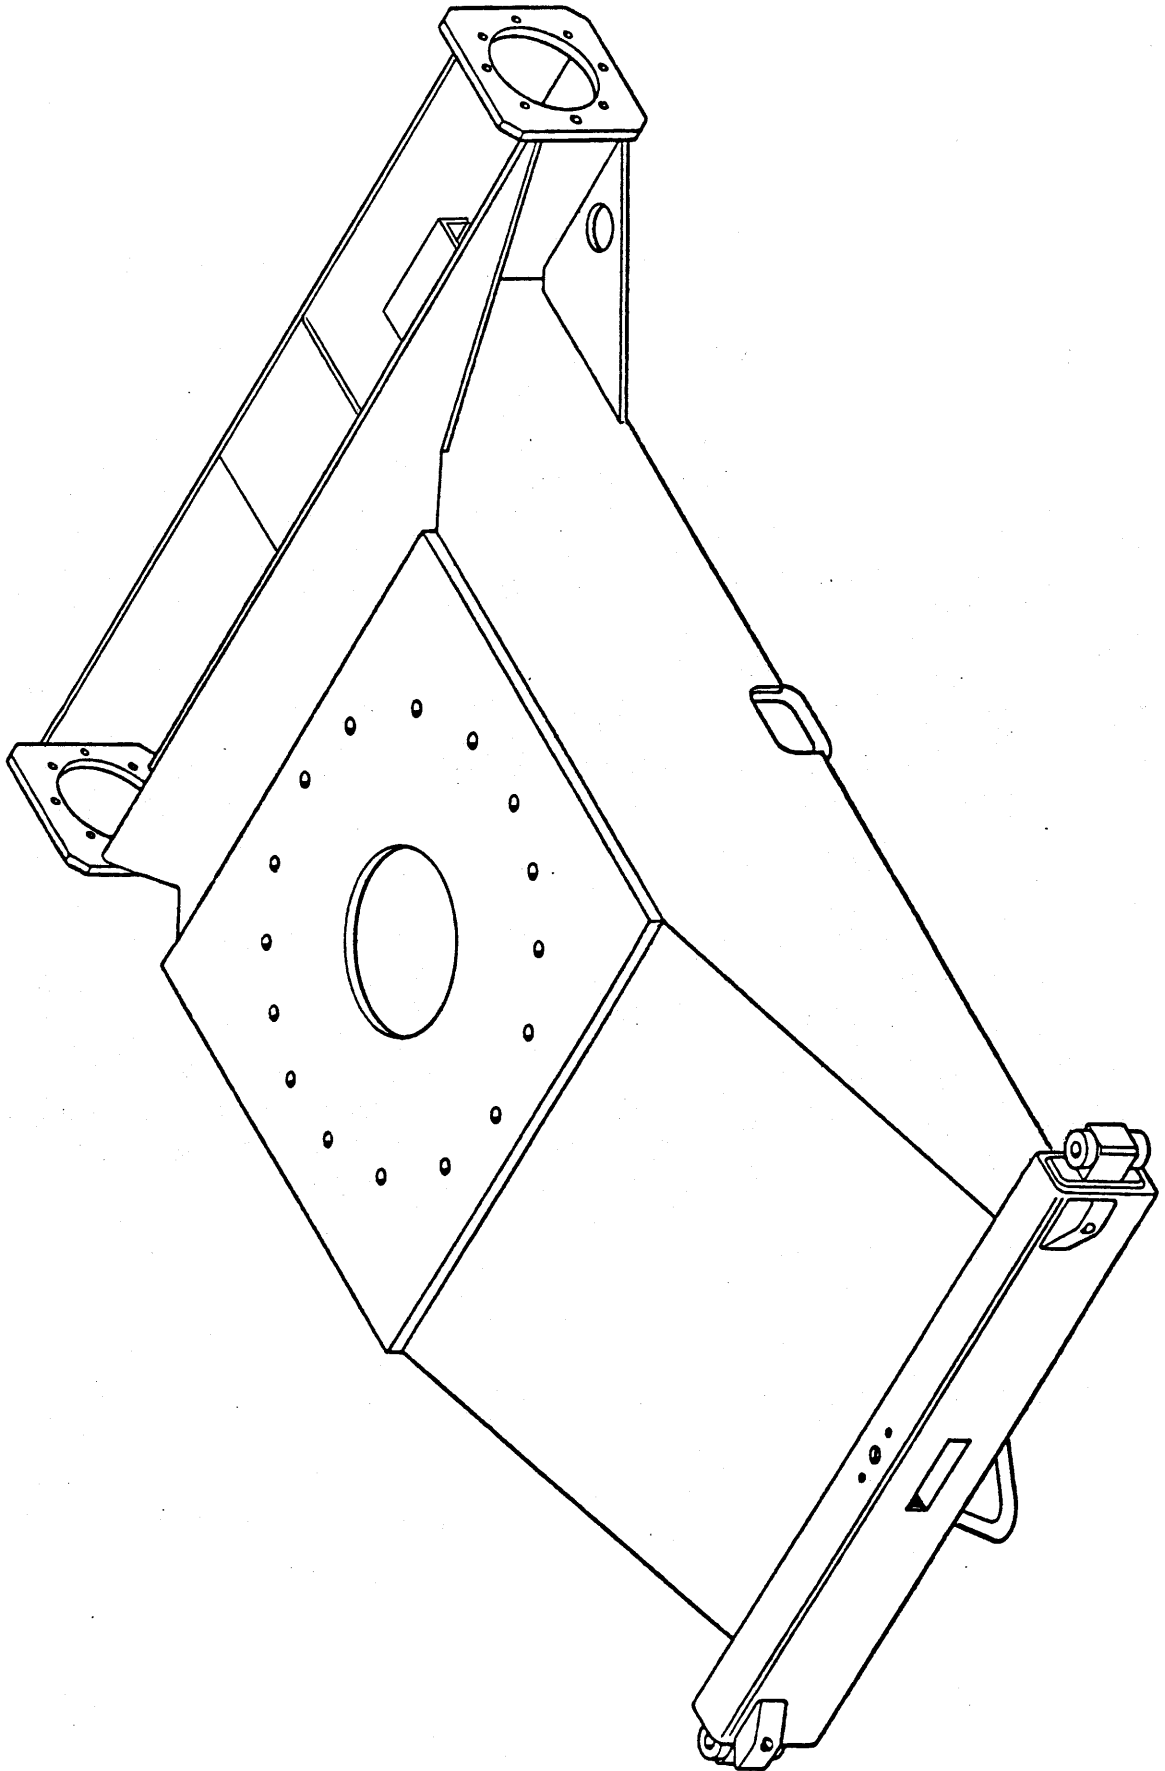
CARRIAGE WELDMENT (ALL MODELS)
